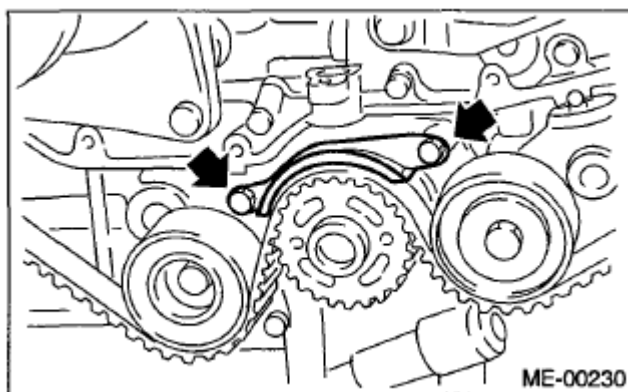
Locating Timing Belt Guide Mounting Bolts (1 Of 4)
